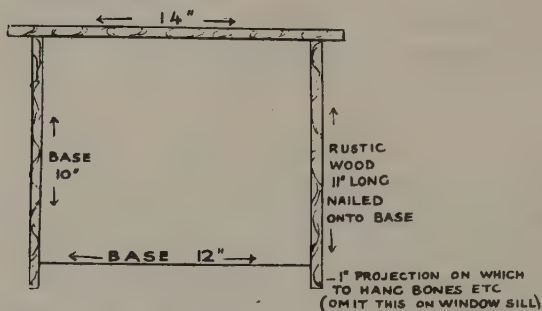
Plan of Simple Bird Table for use on a Pole or Window-Sill
